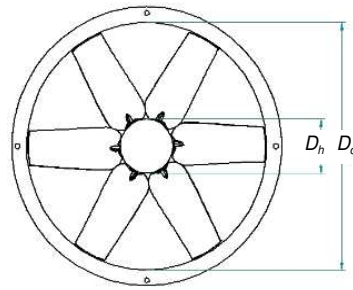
illustrates the configurations for: (i) the datum rotor (AC90/6); and (ii) a modified rotor (designated ‘AC90/6/TF’), which was designed with a view to reducing noise emission. The modified AC90/6/TF rotor blades differed from the datum blades in the vicinity of the tip. The configuration of the AC90/6/TF blade tip, which was
